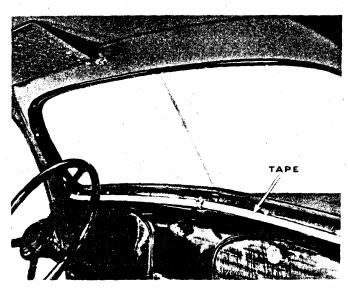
Illustration No. 83 Windshield Opening Taped for Glass Removal.
